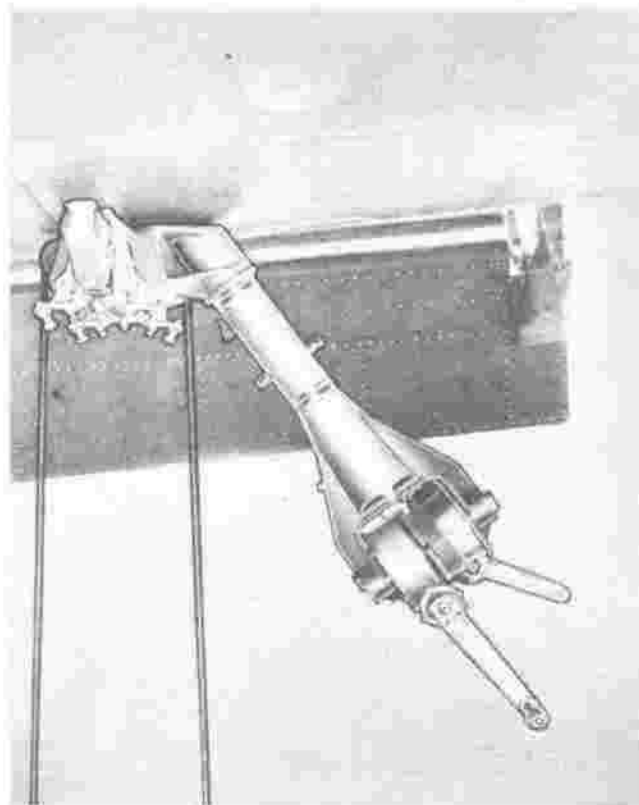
Bomb Hoist Assembly Installed on Wing Bomb Rack
